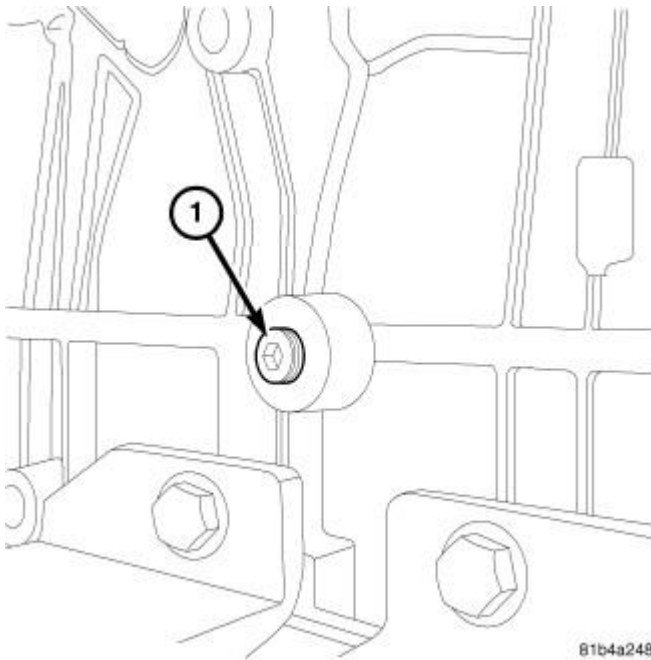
CRANKSHAFT LOCK PLUG LOCATION
